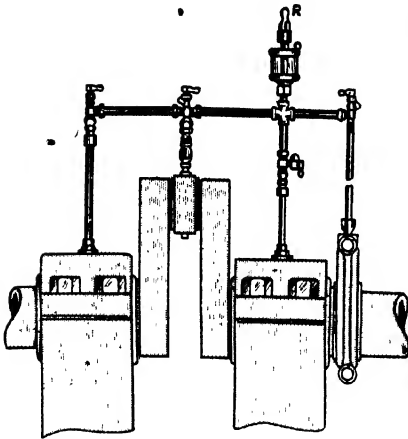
SHOWING WIPER CUP FITTED TO CONNECTING-ROD BIG END
